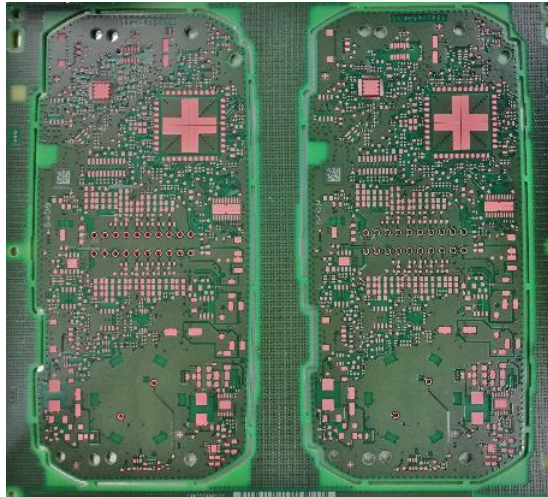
Layout of the top side of the board used for sample production, the Bombardier Compact. This PCB had dimensions of 185 x 165 x 1.55 mm, an OSP surface finish, and each panel had two PCBs incorporated.
